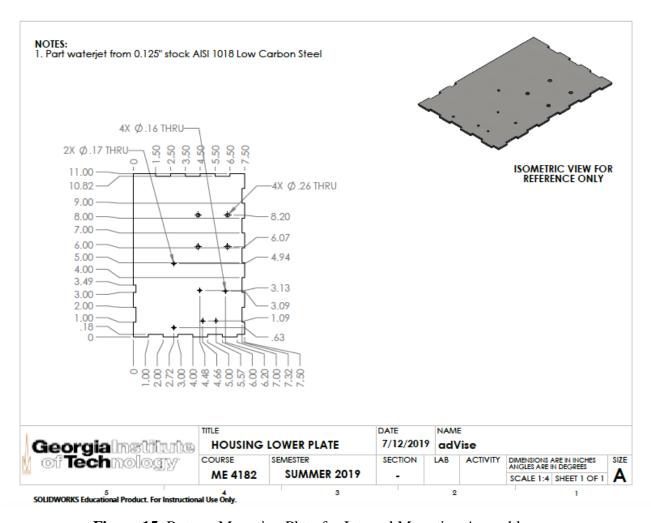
Bottom Mounting Plate for Internal Mounting Assembly.
